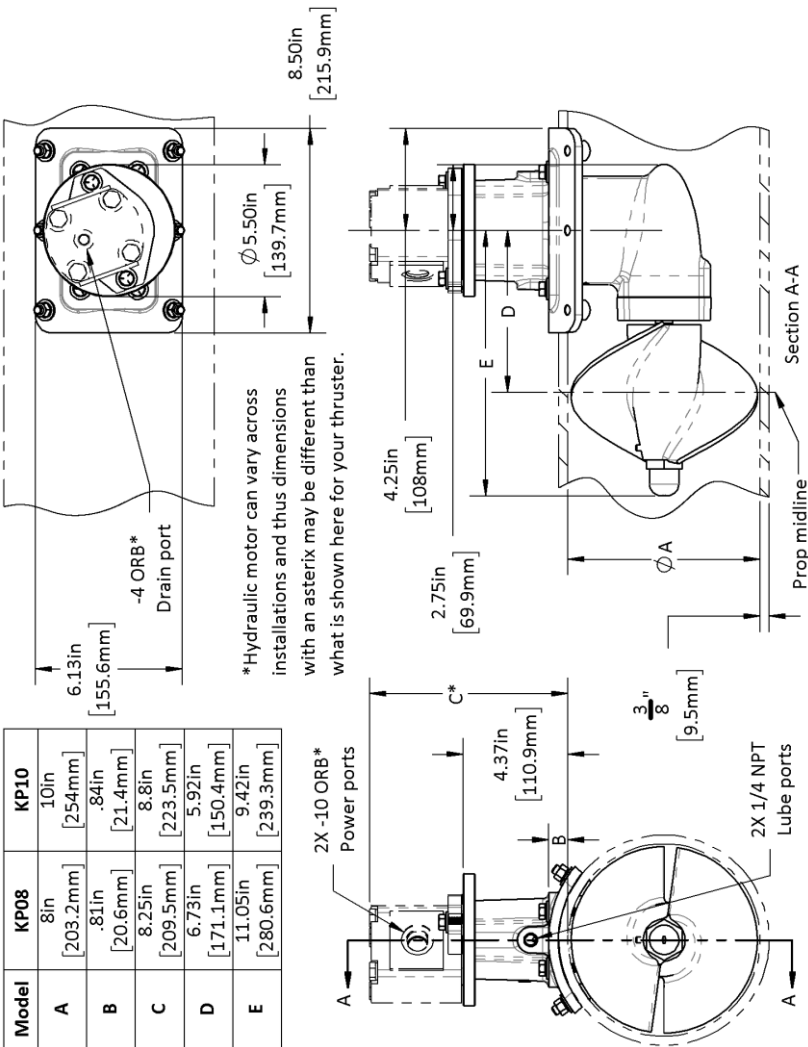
Standard KP08 & KP10 Hydraulic Thrusters Dimensions
